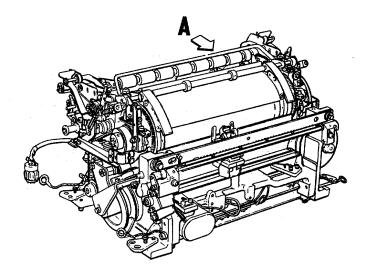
Power Shaft Bearing Sleeve and Ribbon Feed Lever Clearance Adjustment
